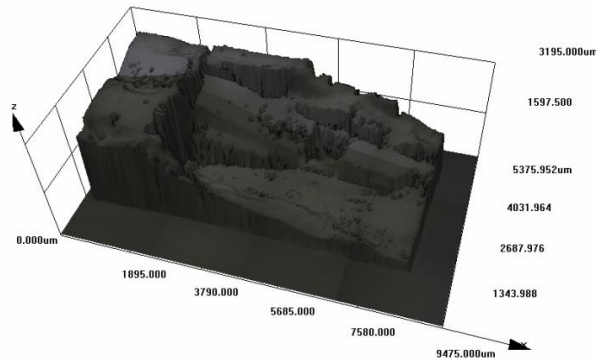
Preview of fracture surface of 7-layered Lam V3B prepared by slip casting.
